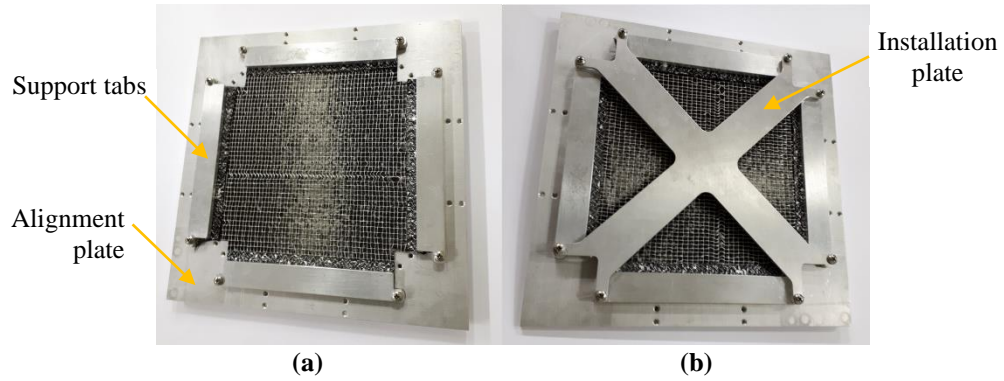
PFT specimen clamping process: (a) Image of the specimen-support tab assembly in an alignment plate, and (b) image of the installation plate bolted to the support tabs.
